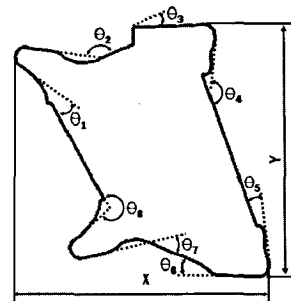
(a) Initial design (D1) of the blank shape and characteristics dimensions for the blank design
